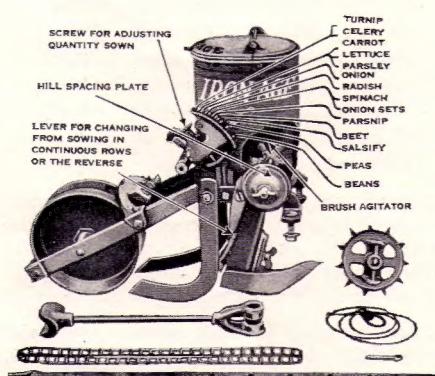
Hill and Drill Seeder Attachment for Nos. 301 and 320, 306, 315, 316
